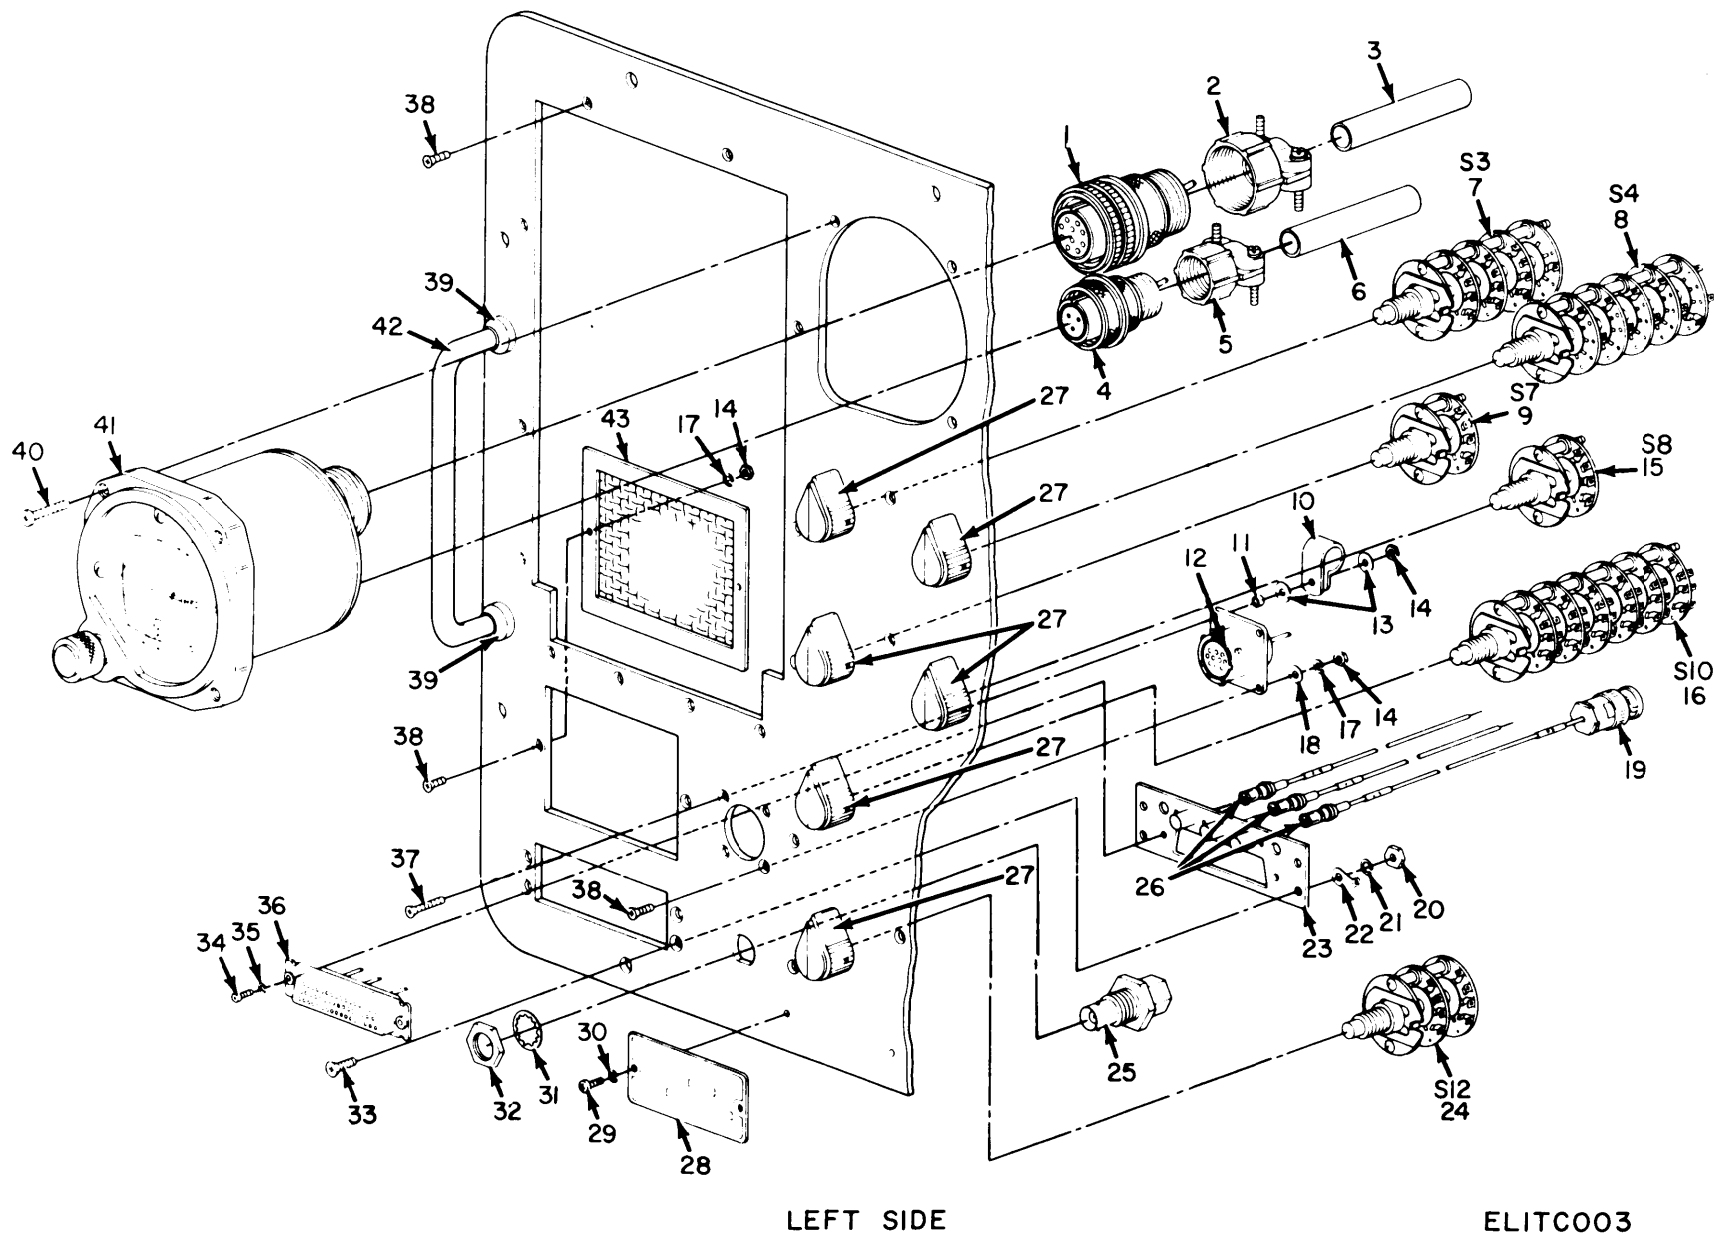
Front Panel Assembly (SMB-504958) (Sheet 1 of 2).
